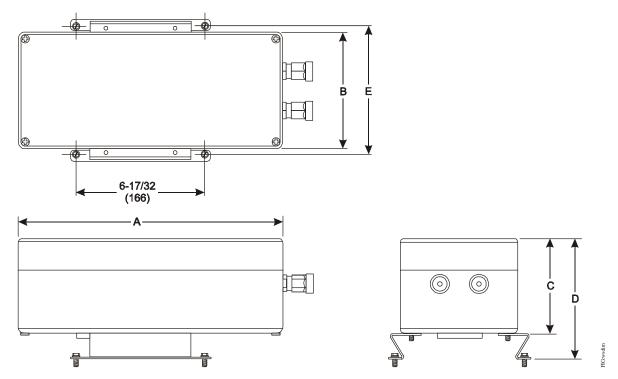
M9000-310 and M9000-320 Weather Shield Enclosure Dimensions, in. (mm) (See Table 3.)
